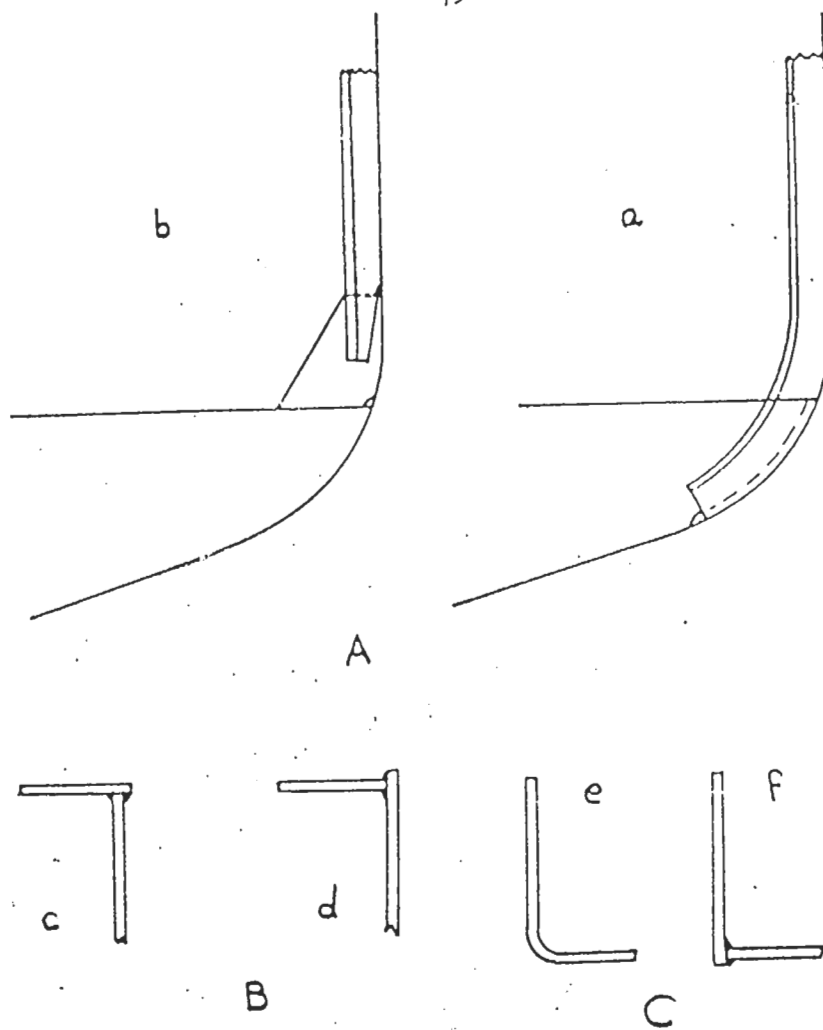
ALTERNATIVE CONSTRUCTIONAL DETAILS
